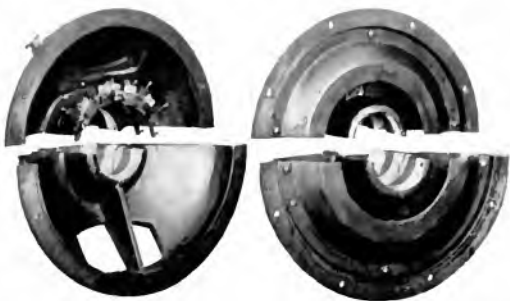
Front and Pulley End Bearing Brackets of Mine-type 50-h.p., 900 r.p.m., 440-volt Wound-rotor Induction Motor
